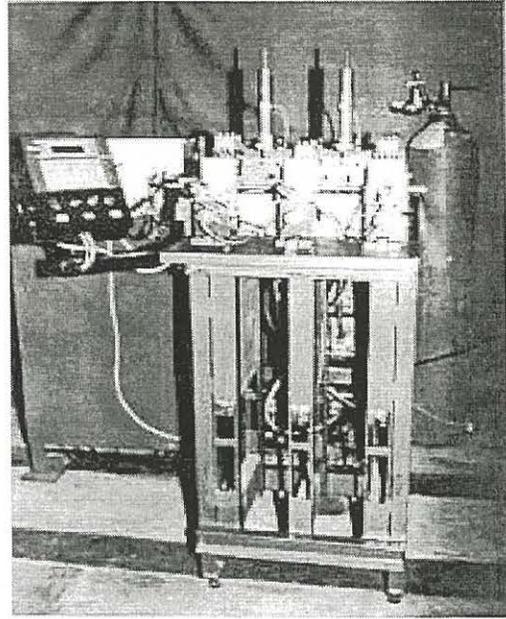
INDIGENOUS EQUIPMENT DEVELOPED FOR RESISTANCE WELDING OF Zr-4 BEARING PADS ON Zr-4 FUEL CLADDING.
